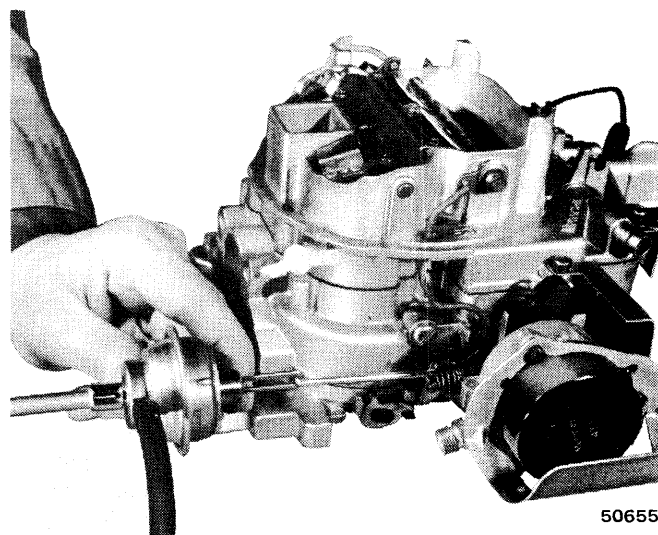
Adjusting Initial Choke Valve Clearance
